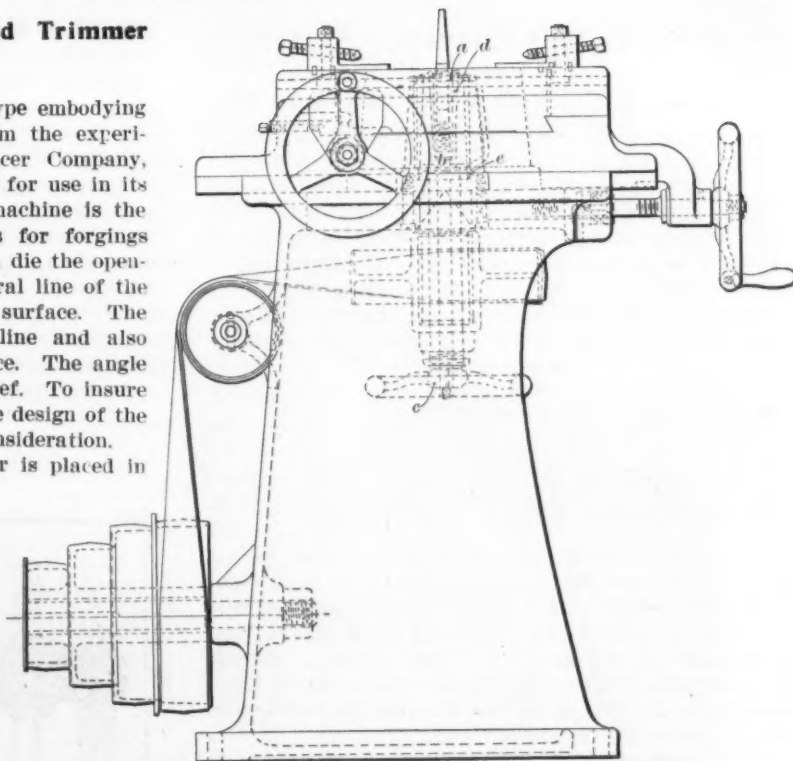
Elevation of the Billings & Spencer Improved Trimmer Miller.
